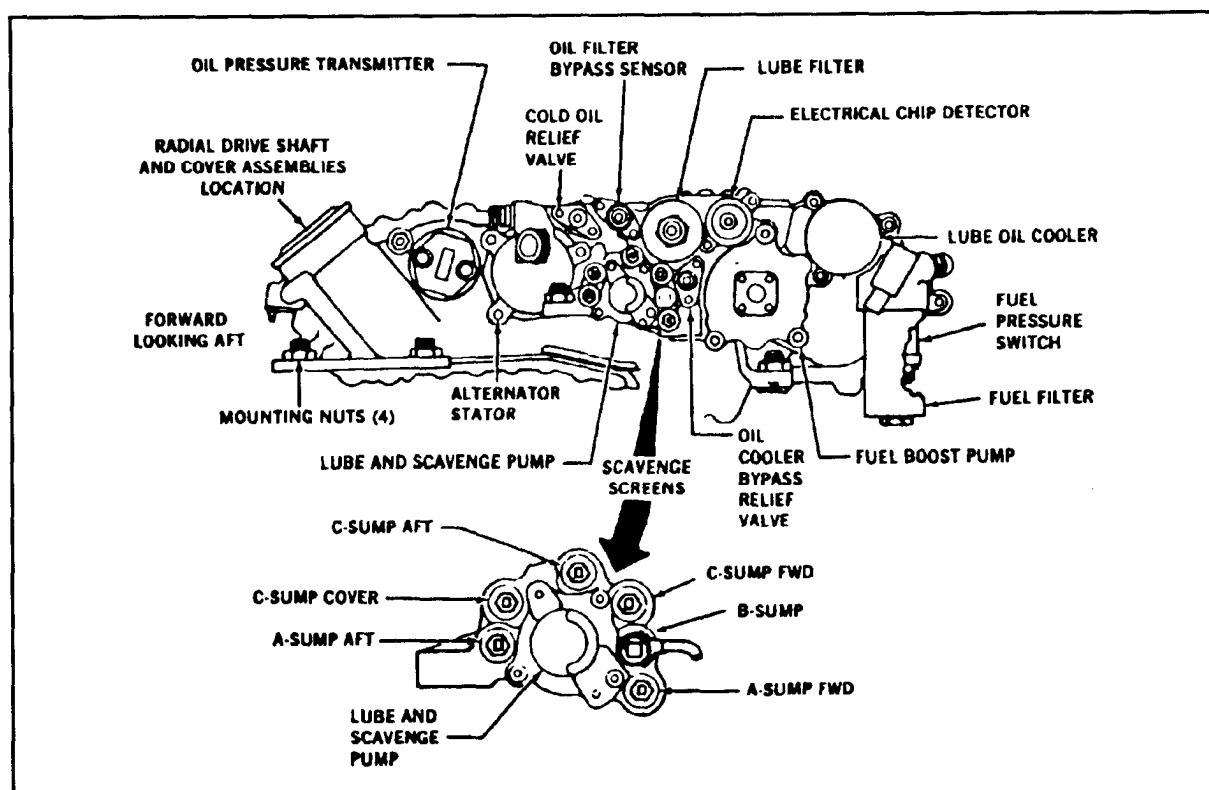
(T-701) Component Locations on Accessory Section Module
